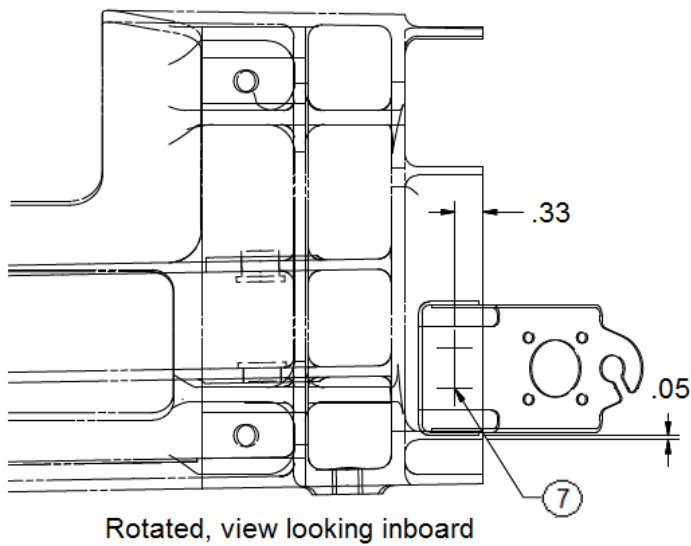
Tailboom Assembly (Sheet 3 of 4)
